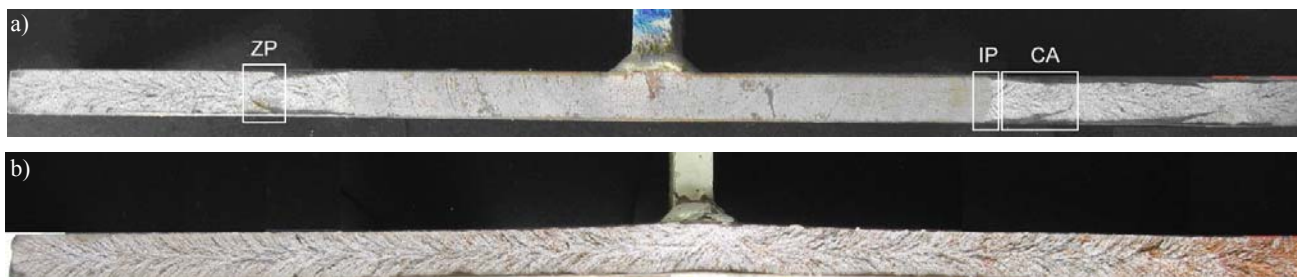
(a) Lug (pos. 68) fracture (fatigue, stable crack growth and brittle fracture), (b) Brittle fracture of lug (pos. 62).
